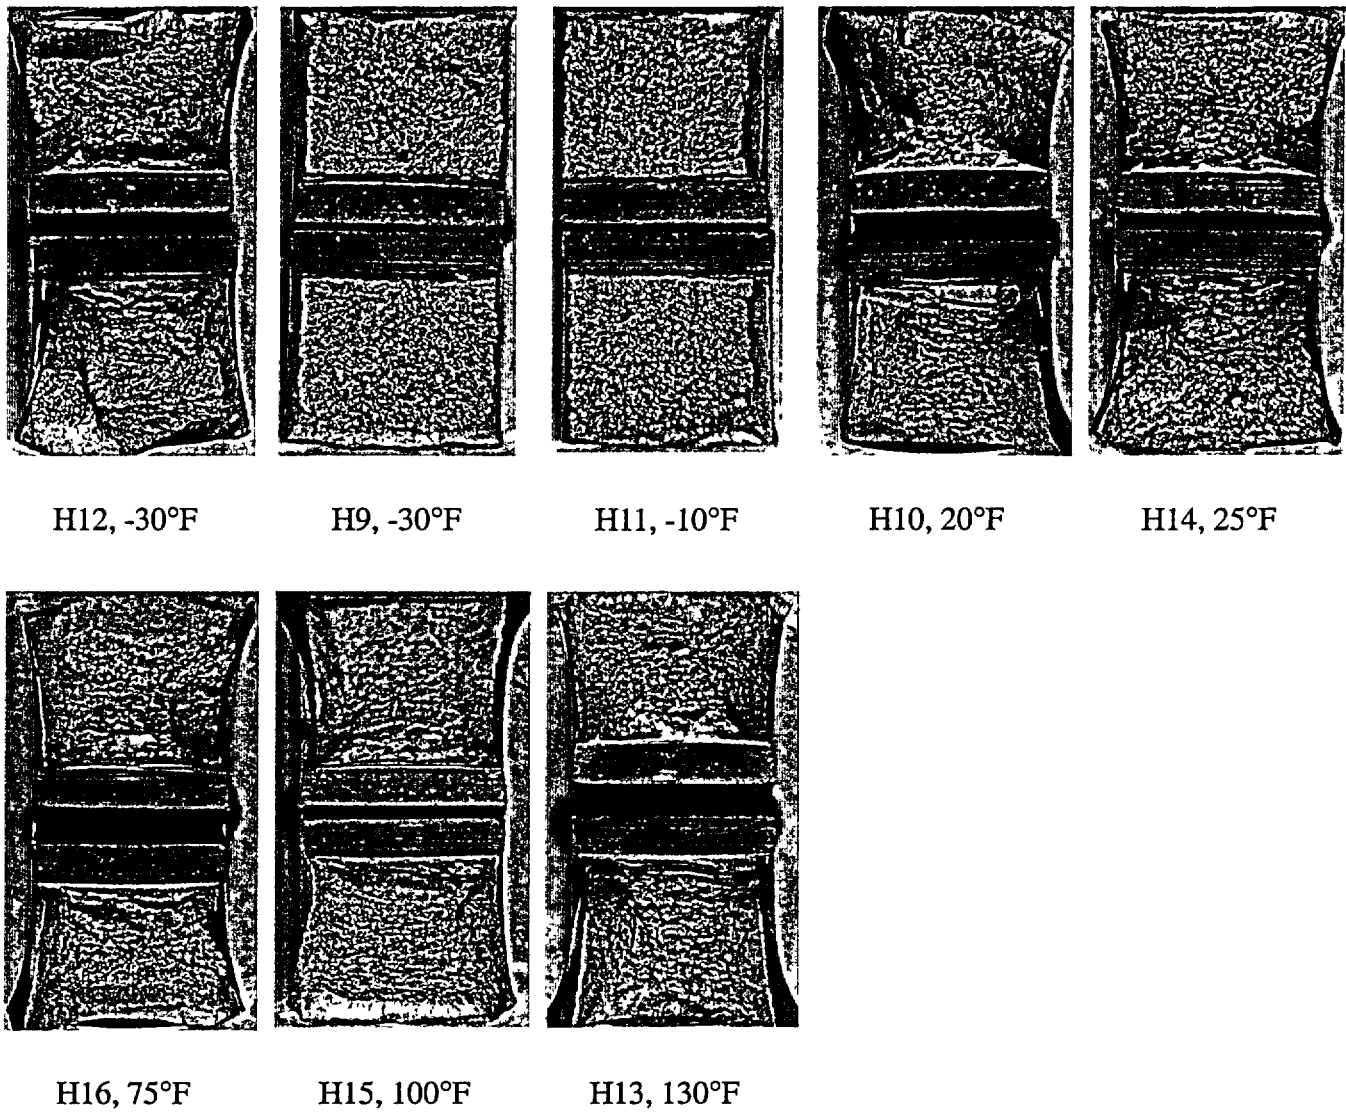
Charpy Impact Specimen Fracture Surfaces for Turkey Point Unit 3 Reactor Vessel Weld HAZ Metal
